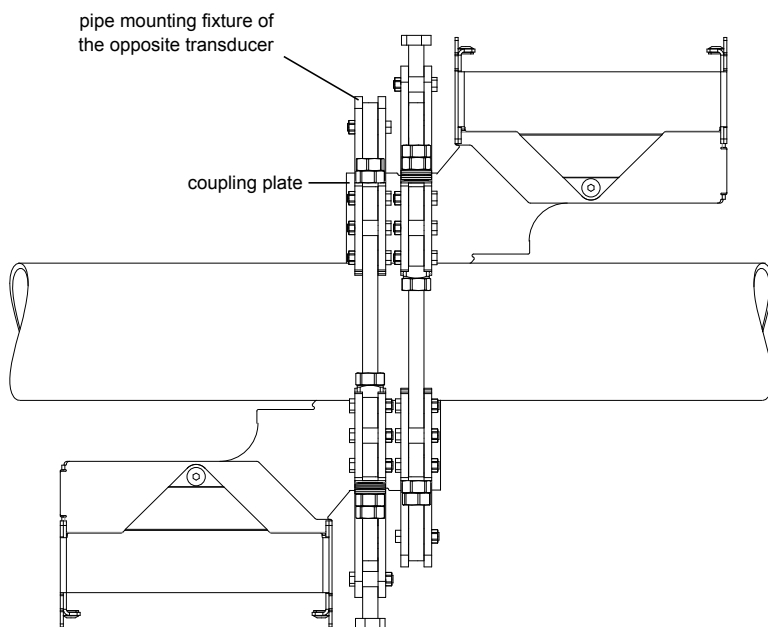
Coupling plate in the pipe mounting fixture of the opposite transducer
